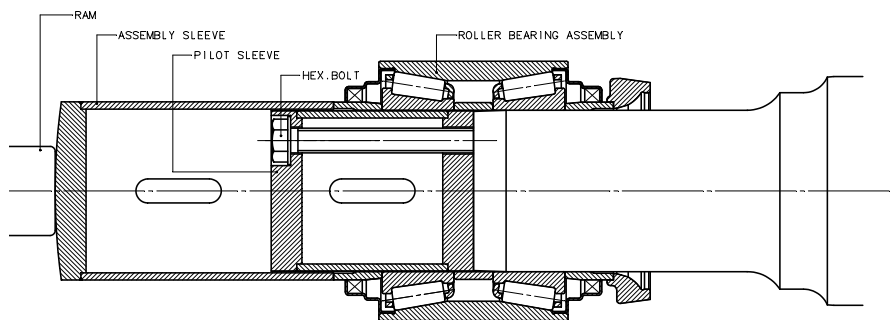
Separate sleeve method of applying roller bearings to an axle.
